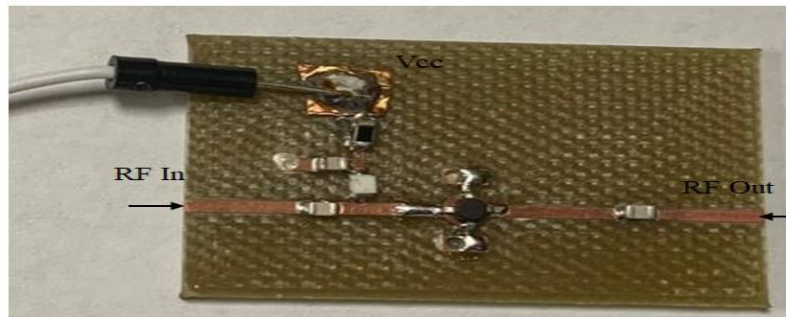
Assembled Board of the Amplifier Containing the TriQuint AG303-86.
